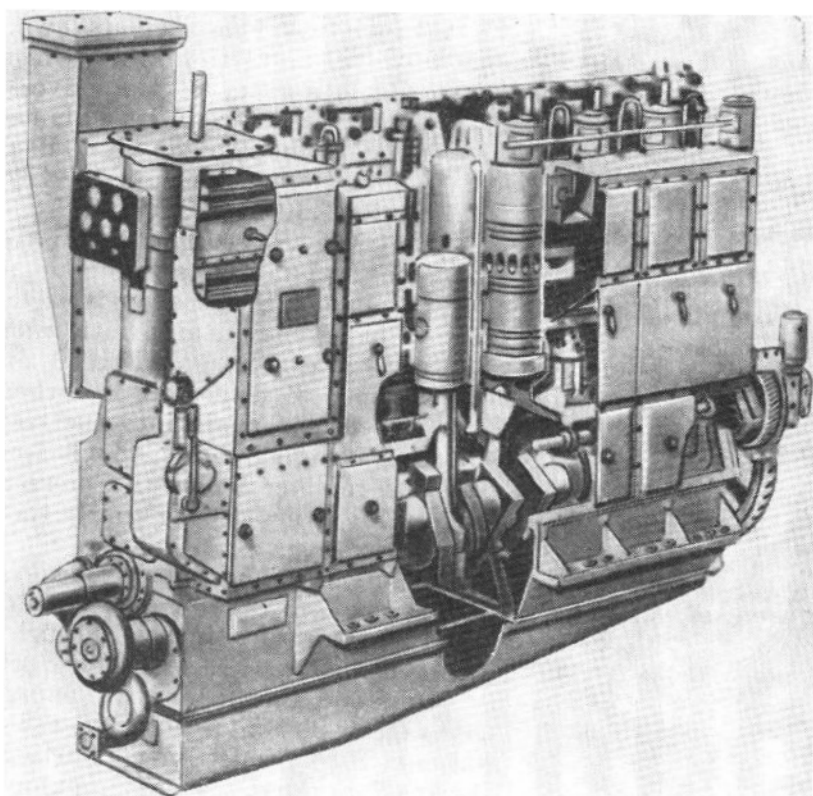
General view of series Д and ДР 30 50 diesel engine
